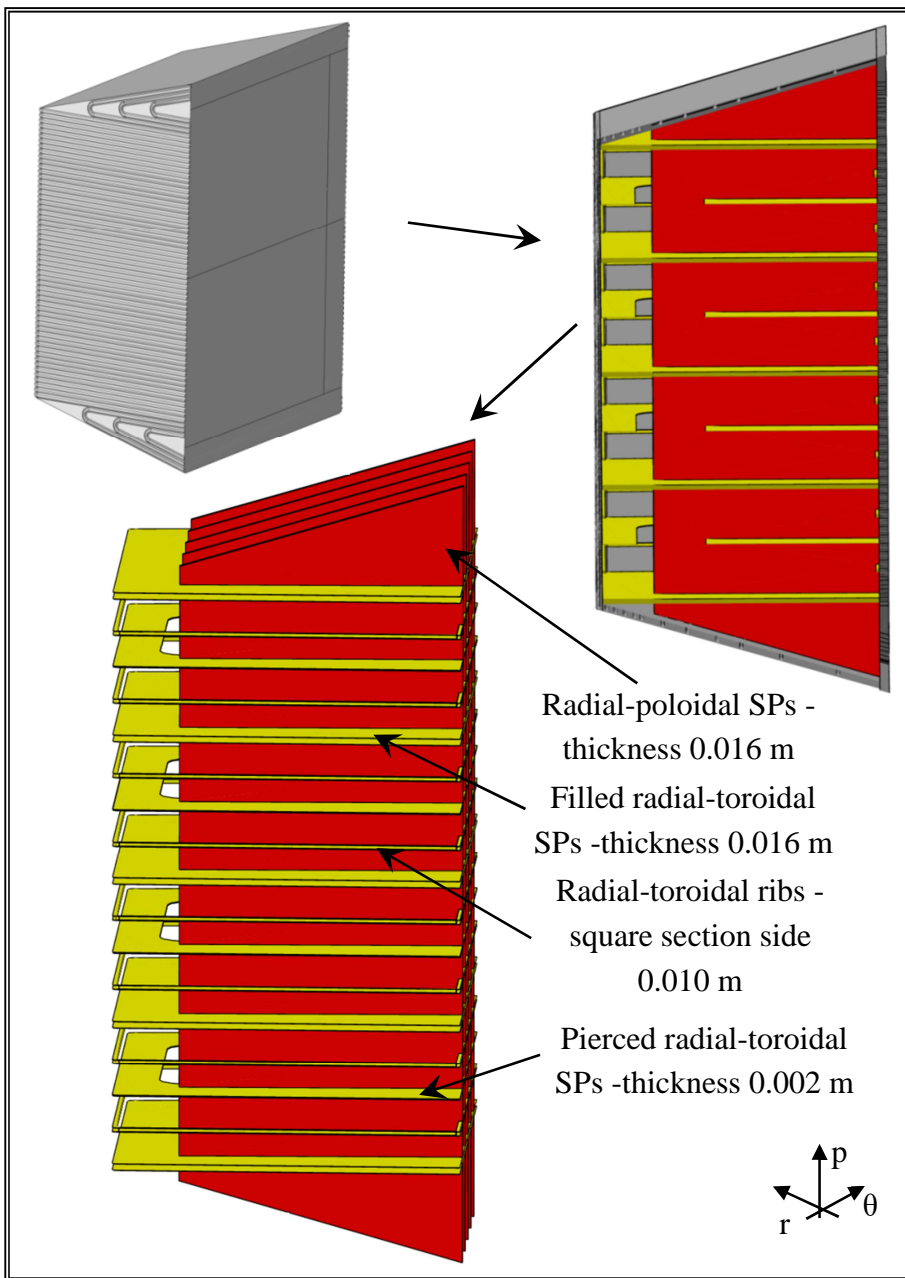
Configuration 3 - Case 3 - 3D geometric model exploded view.
